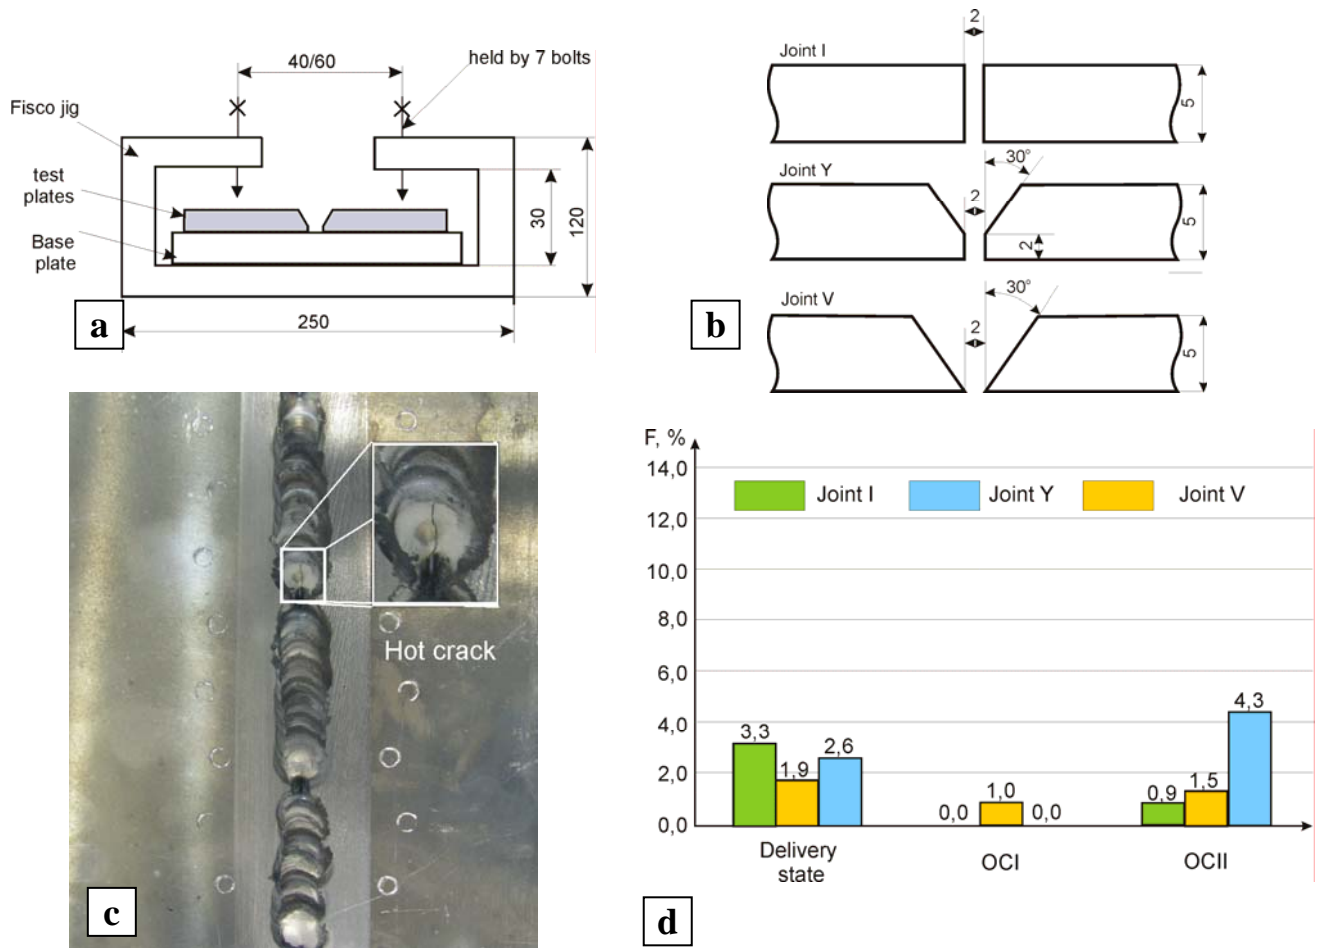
Fisco test: a) basic dimensions of test jig, b) bevelling of test plates, c) hot cracking of the AZ91 alloy after casting during the Fisco test, d) evaluation of susceptibility of AZ91E alloy to hot cracking in conditions of constant joint stiffness – Fisco test
